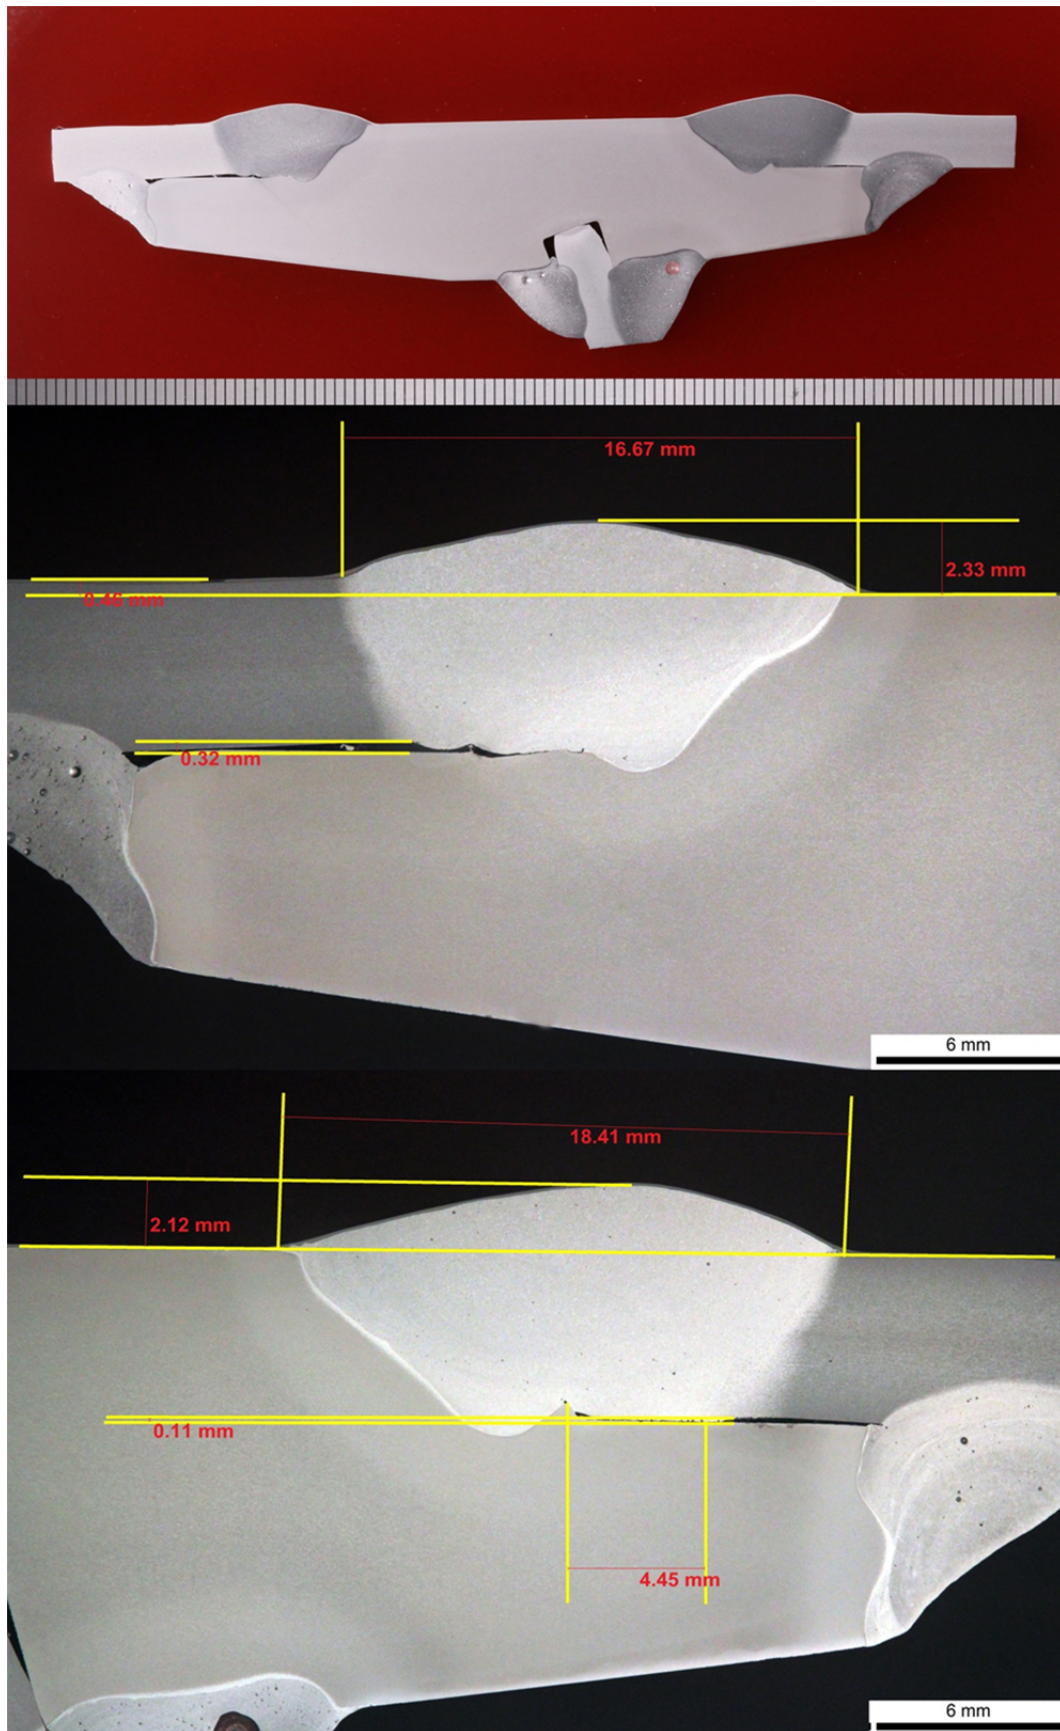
Image of the rear weld section sent to TWI and a diagram showing the location of additional sampling.
